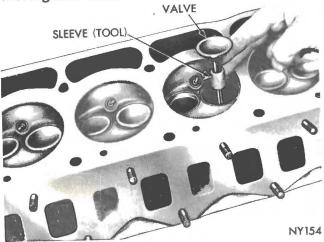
Checking wear with sleeves (Tool CA-3026).
